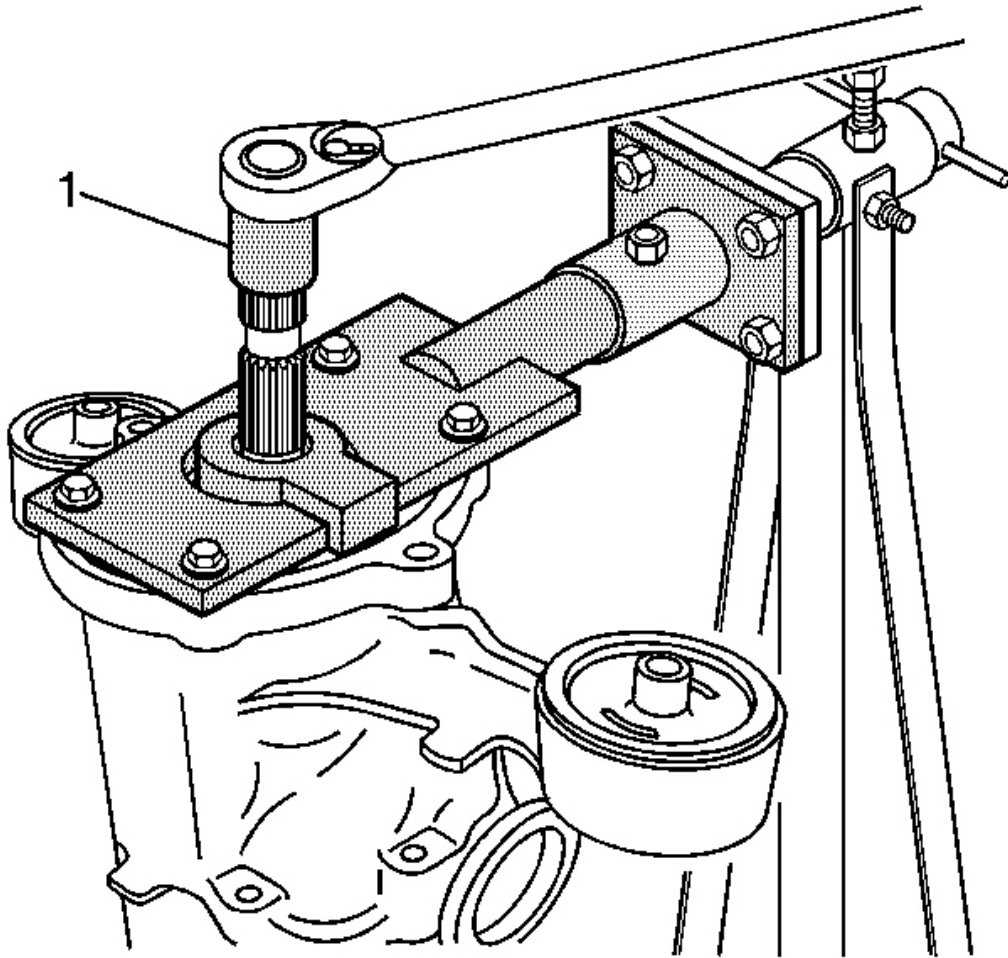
Placing J44865 & Breaker Bar Over The Pinion Splines
